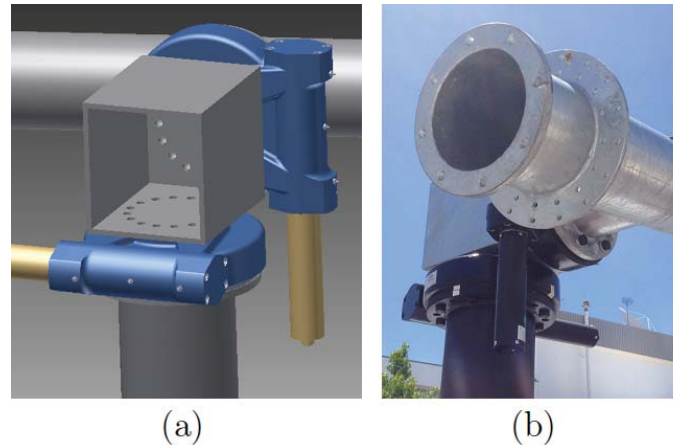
Actuators with DC motors fitted in perpendicular fashion shown in (a) CAD assembly and (b) as-constructed dual-axis configuration.
